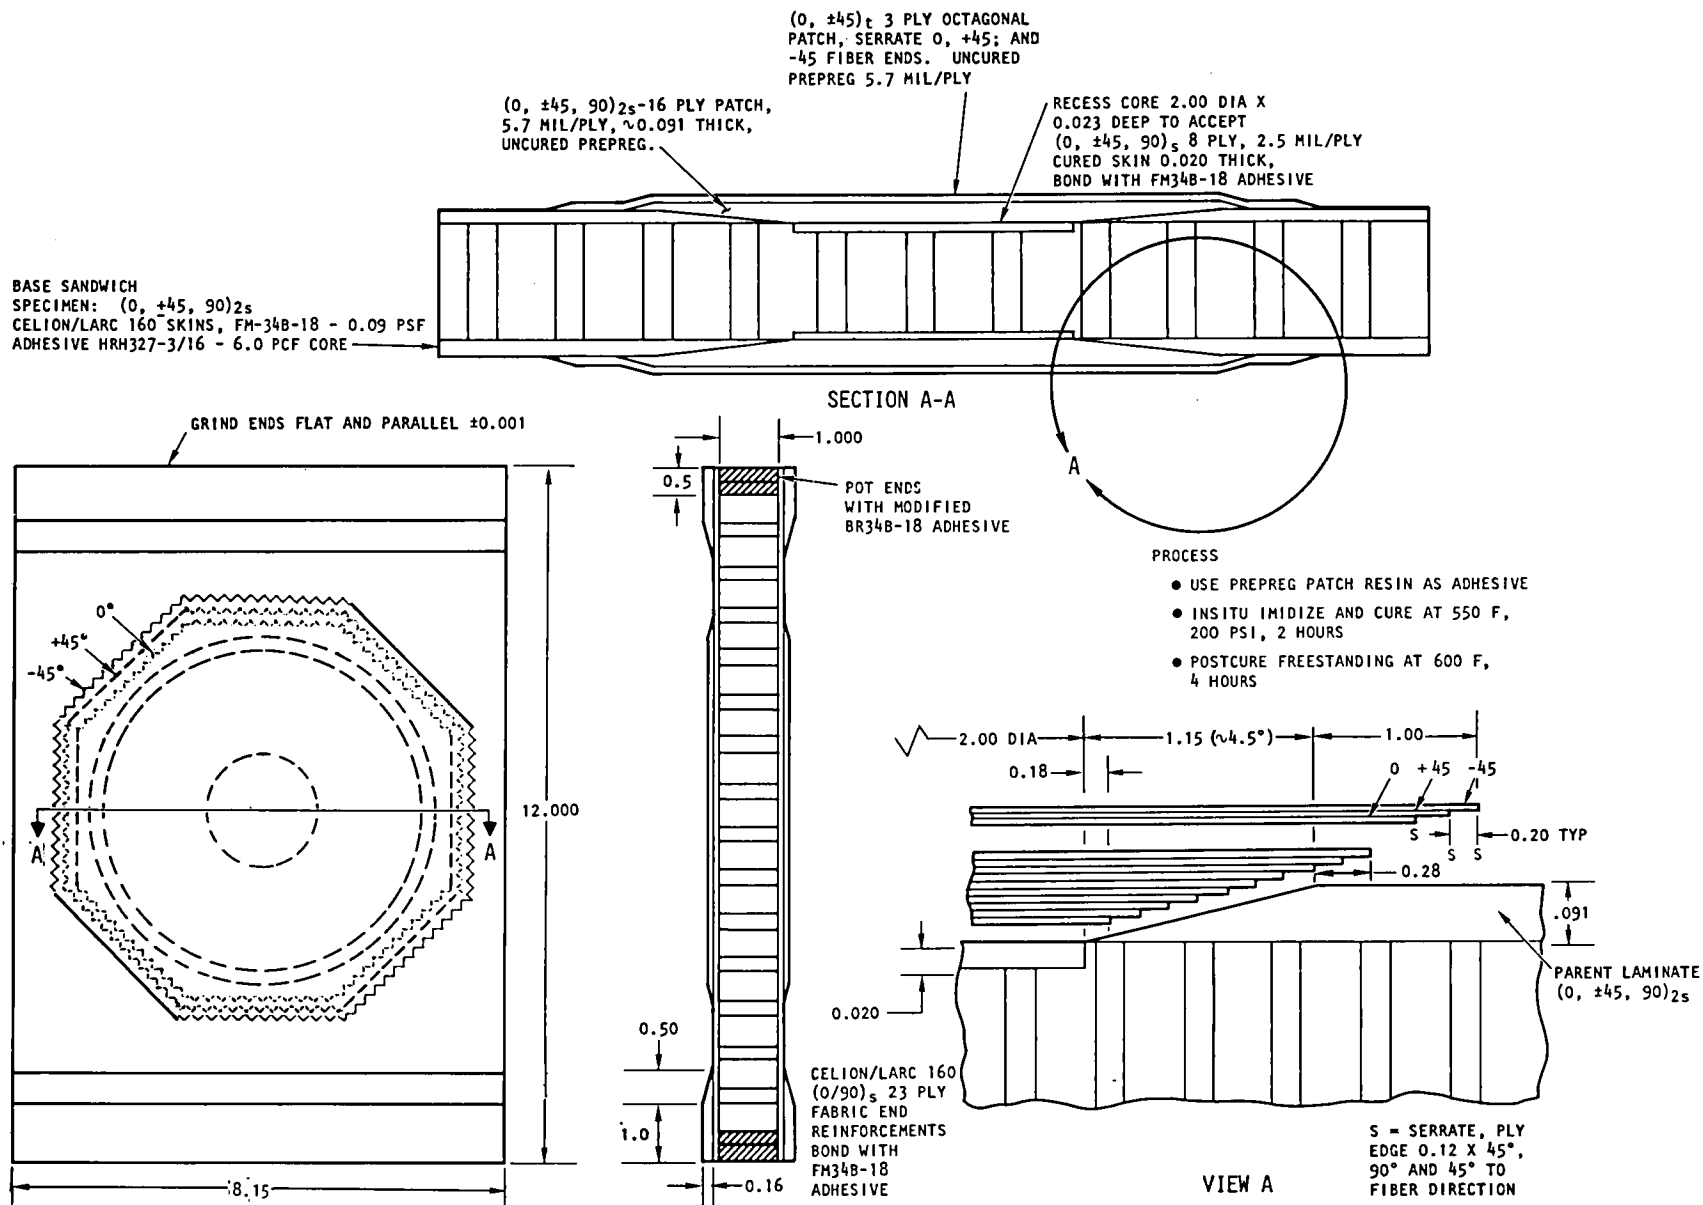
Cocure Repair Design Concept for Heavily Loaded Sandwich Structure Compression Specimen
